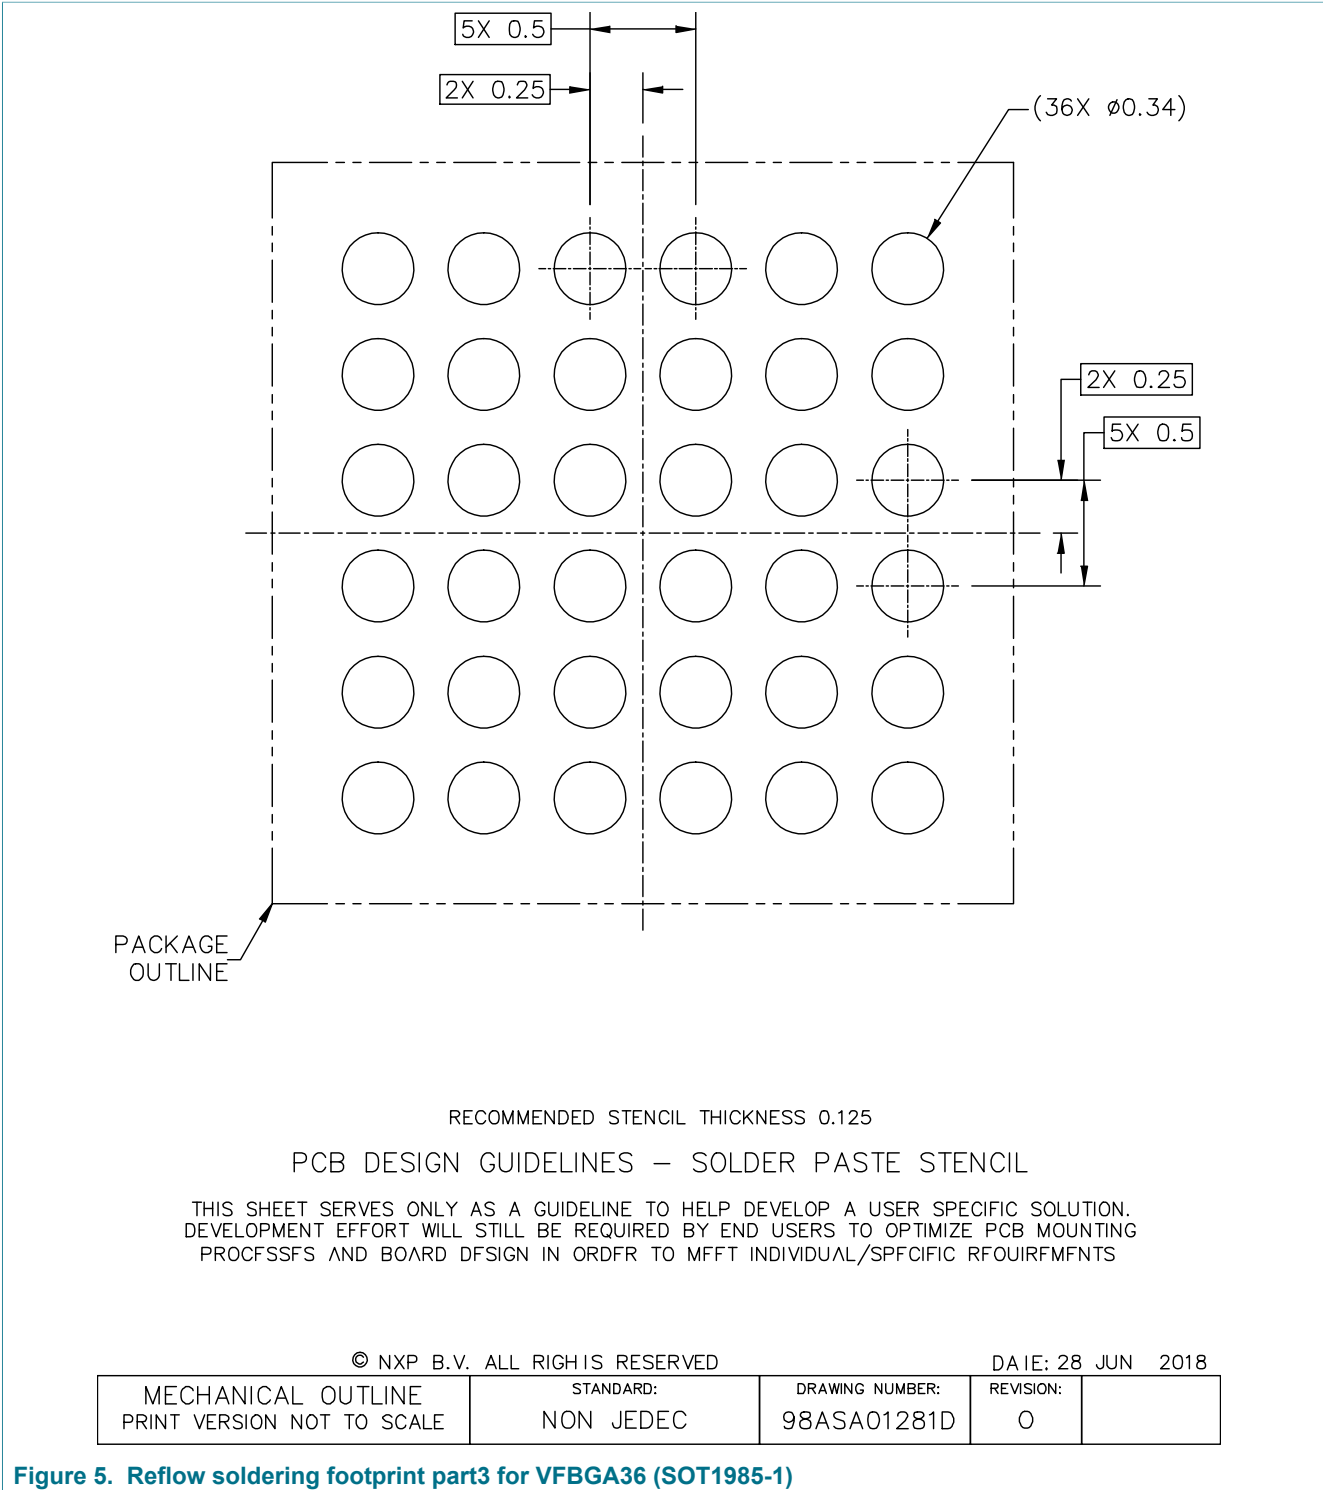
Reflow soldering footprint part3 for VFBGA36 (SOT1985-1)
